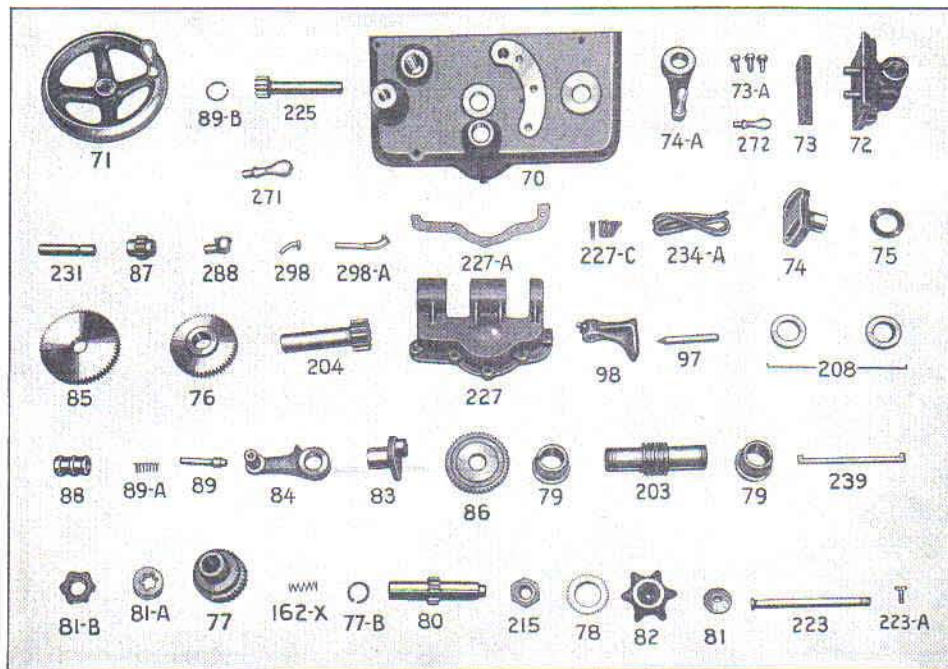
Apron Parts for Series "R", and "T" Lathes.
